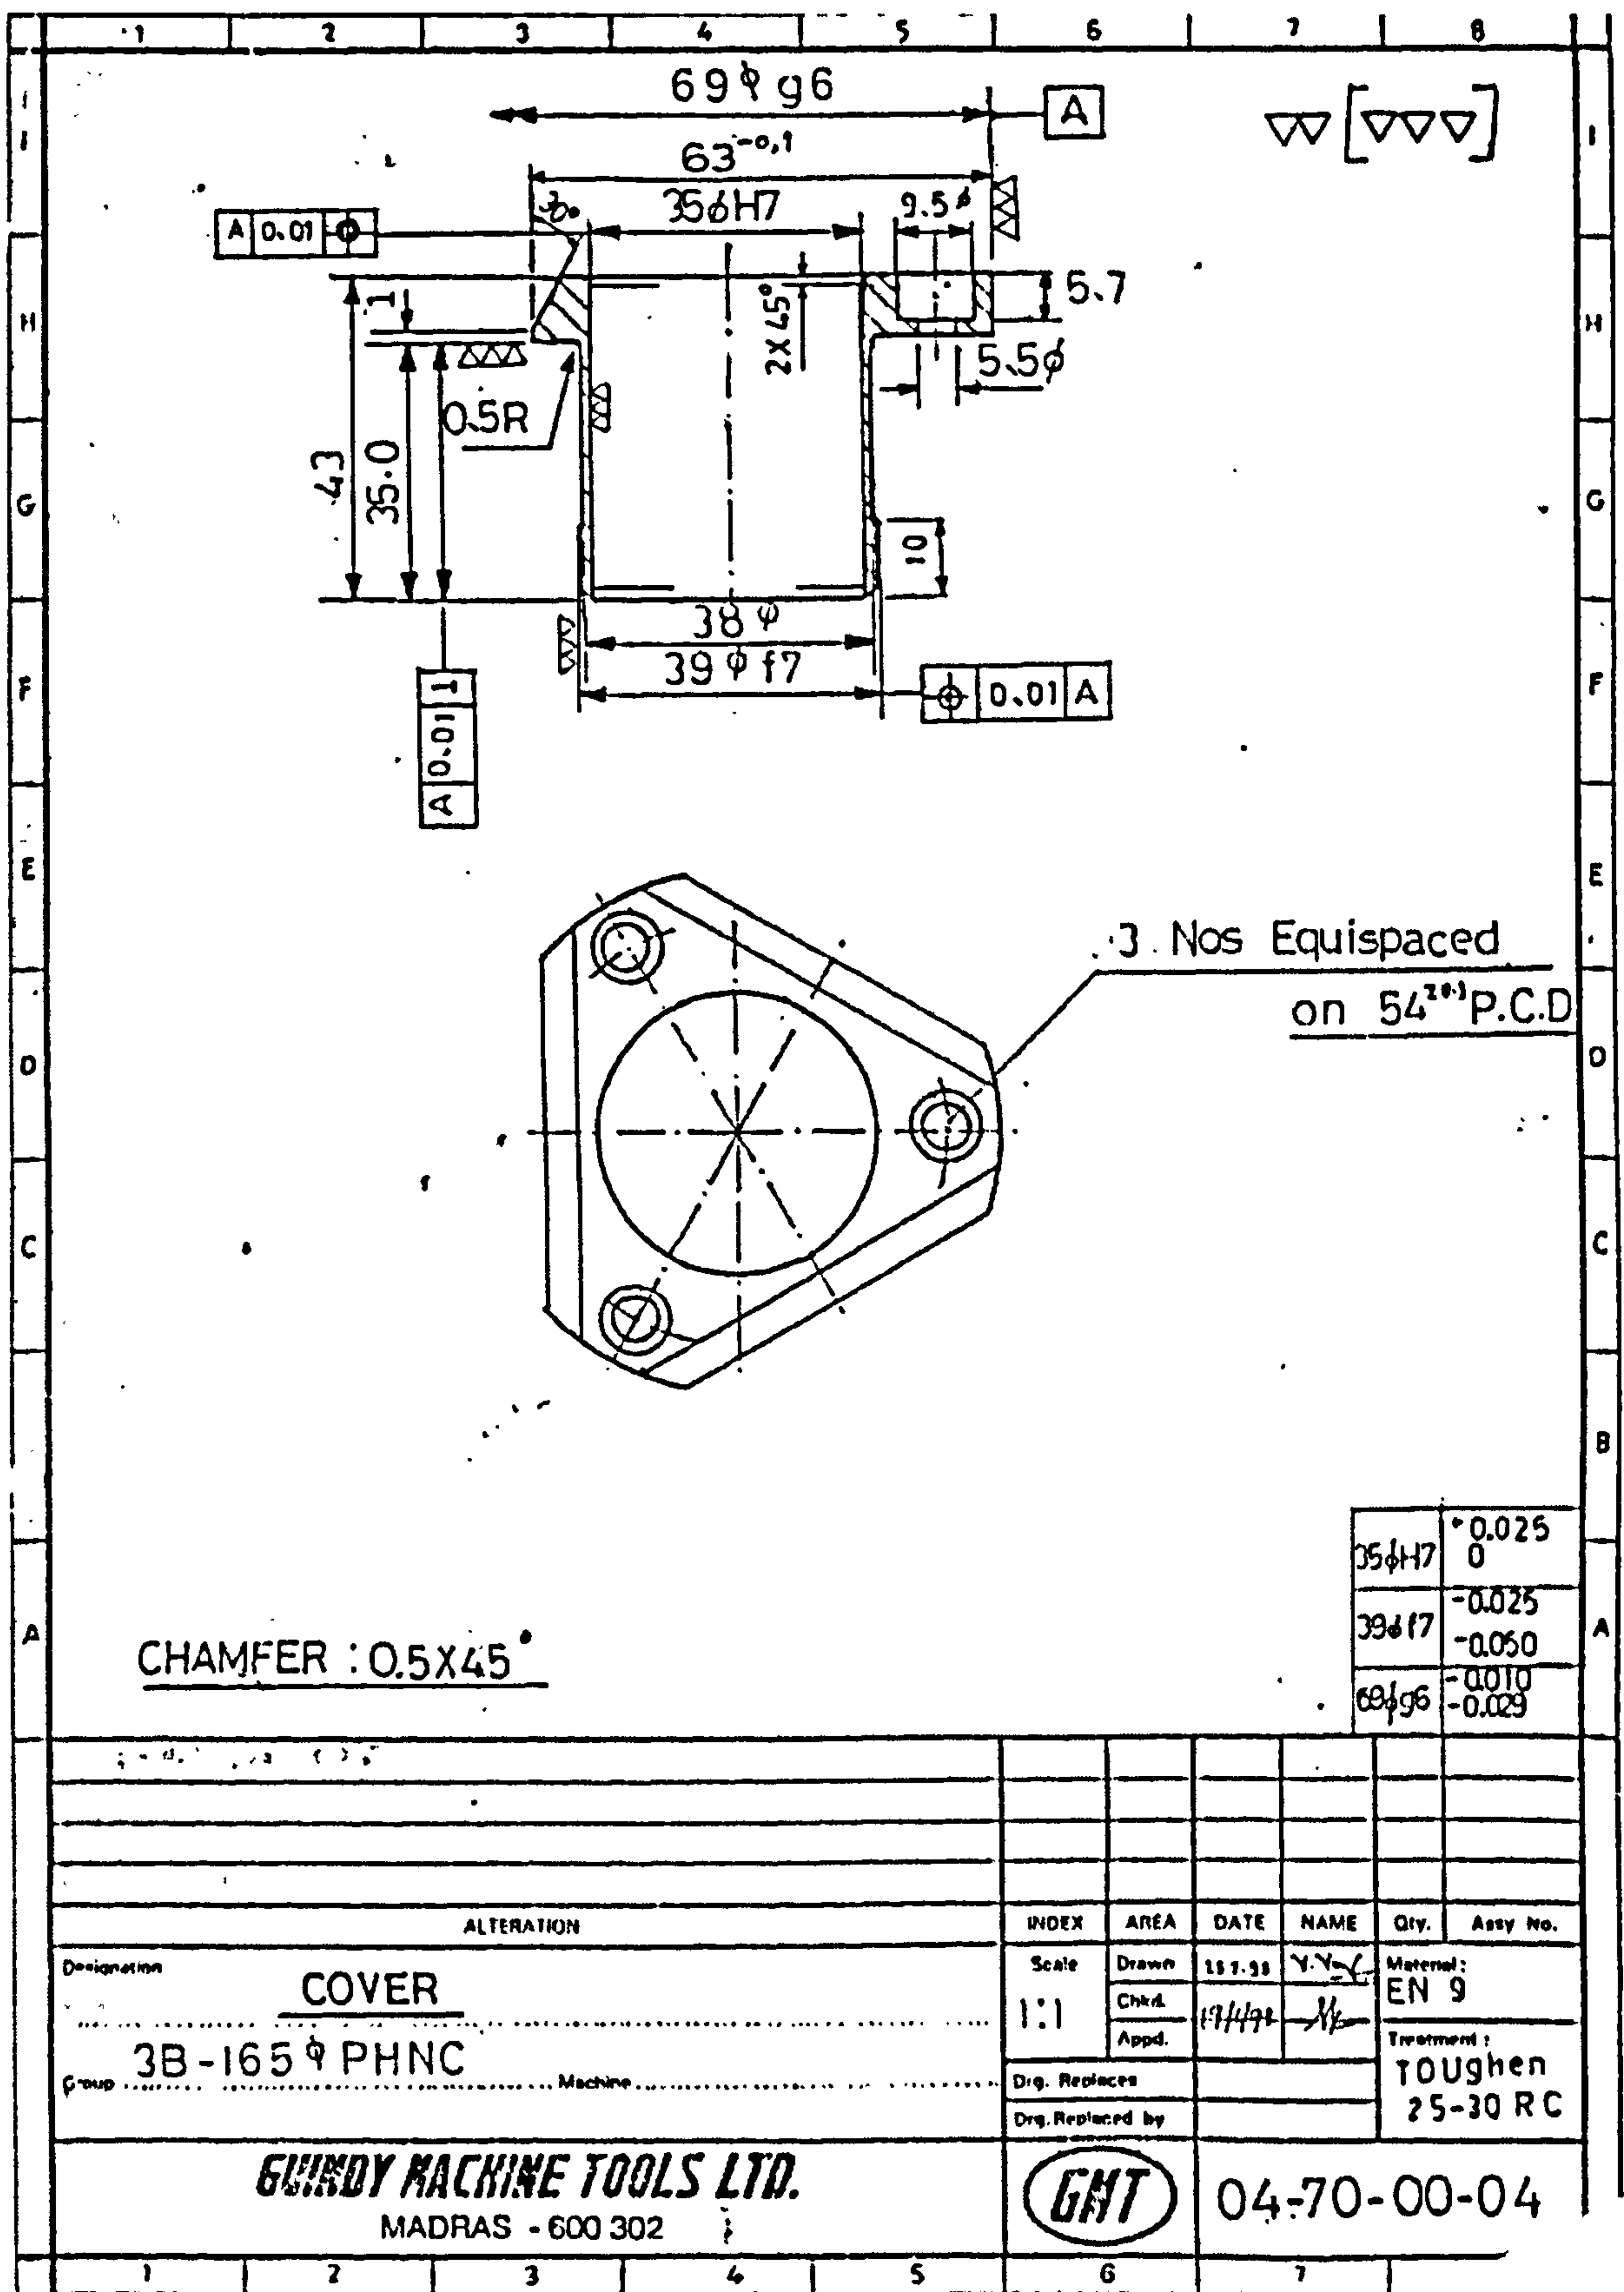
GMT Chuck Cover – Example Manufacturing Drawing
